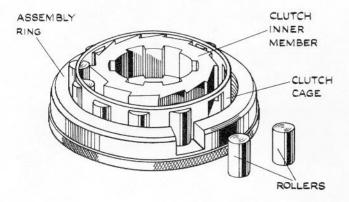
Assembly of uni-directional roller clutch in assembly ring Churchill L178
